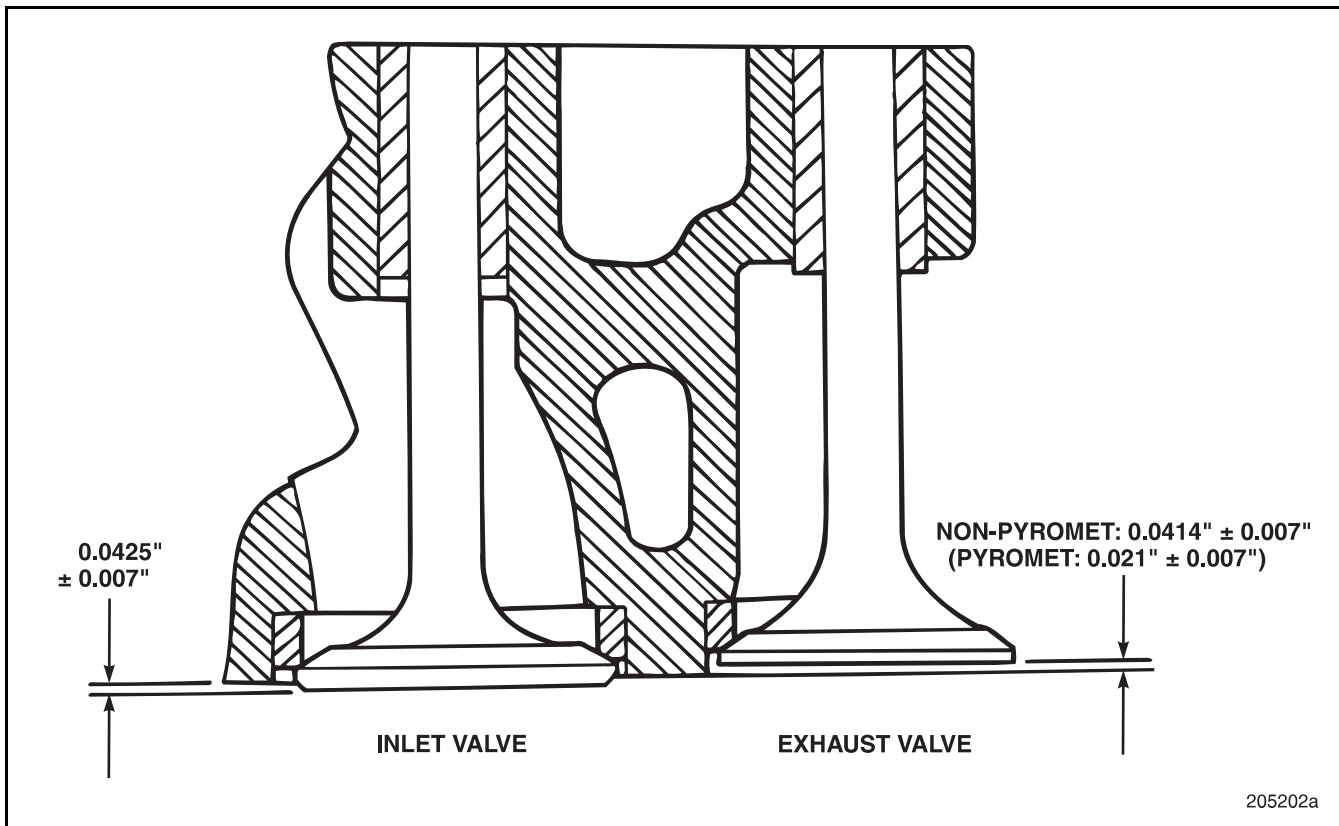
Inlet/Exhaust Valve Head Depth Measurement
